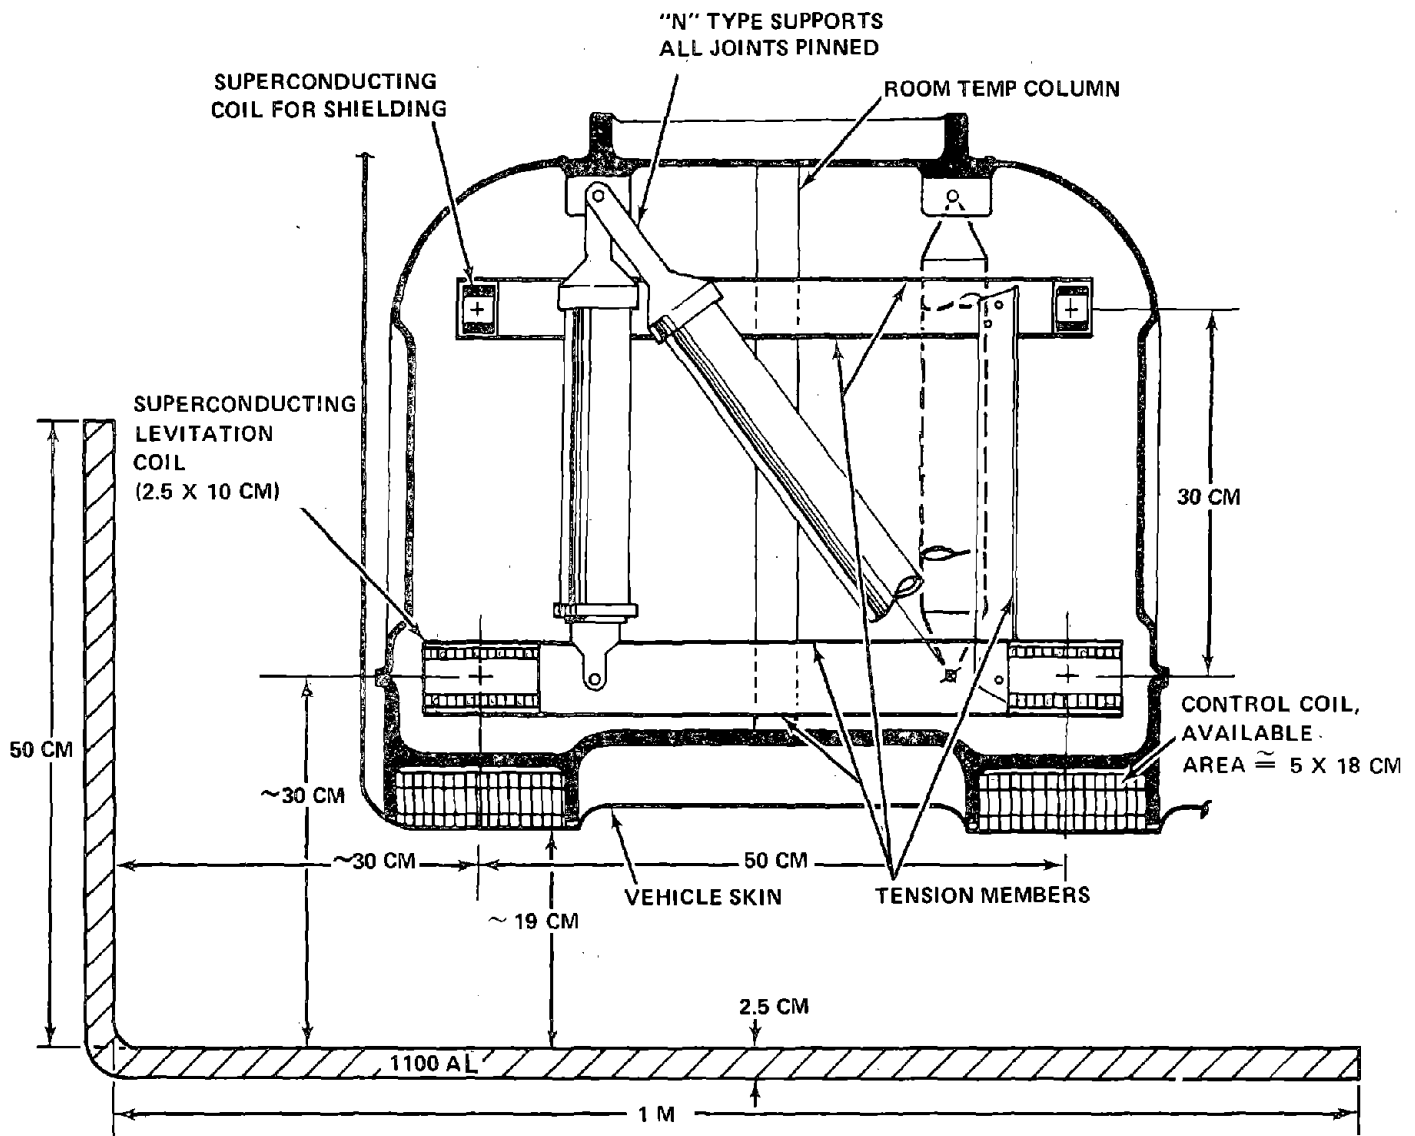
CROSS SECTION OF BASELINE MAGNET ASSEMBLY WITH SHIELDING COIL
